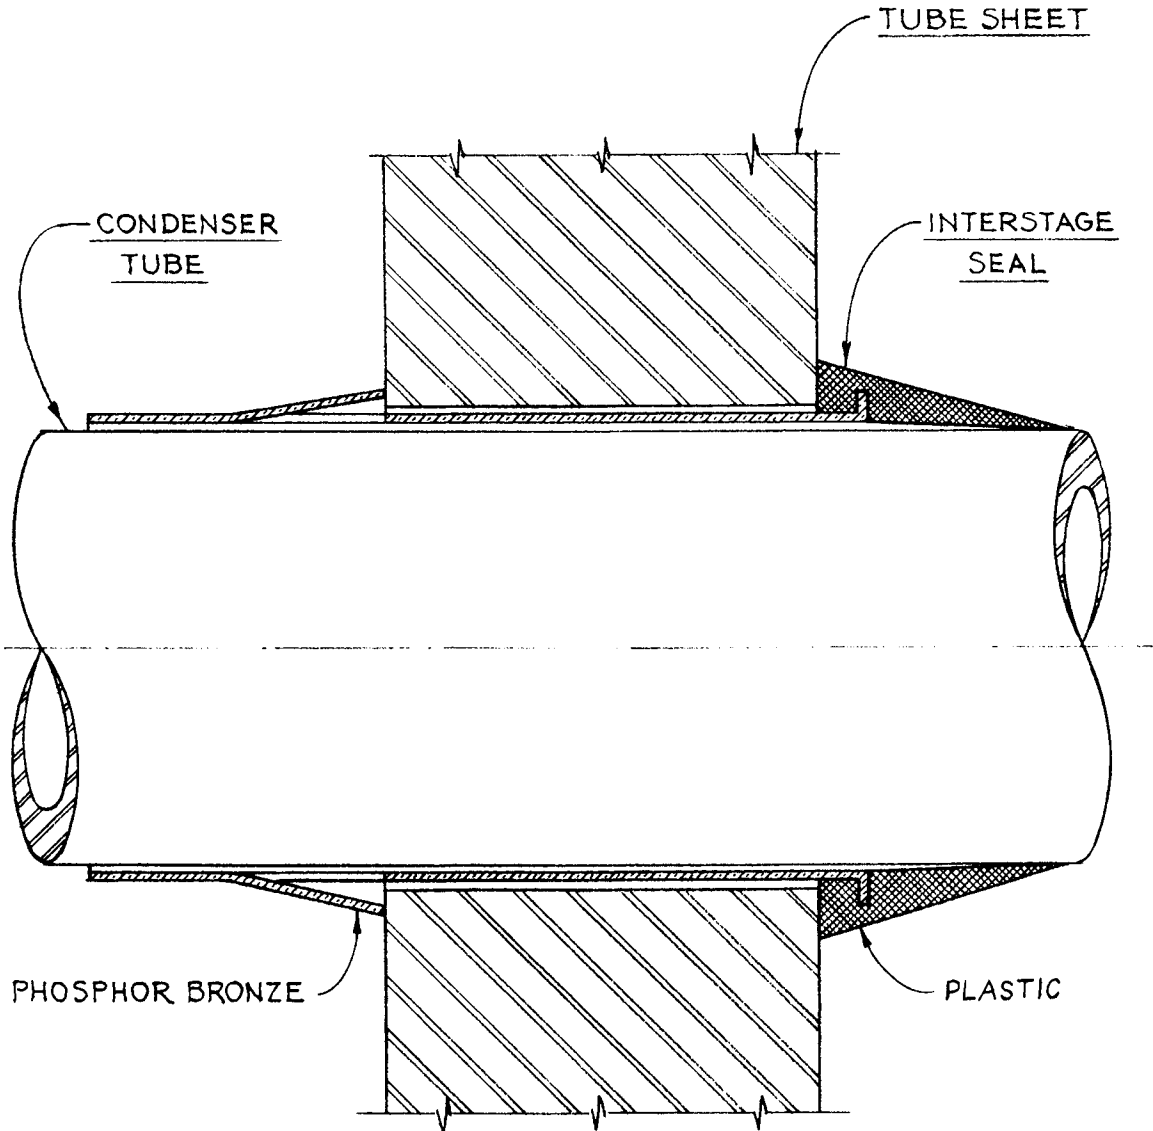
Seal Design 2. Tube diameter, 0.750 in.; hole diameter, 0.875 in.
